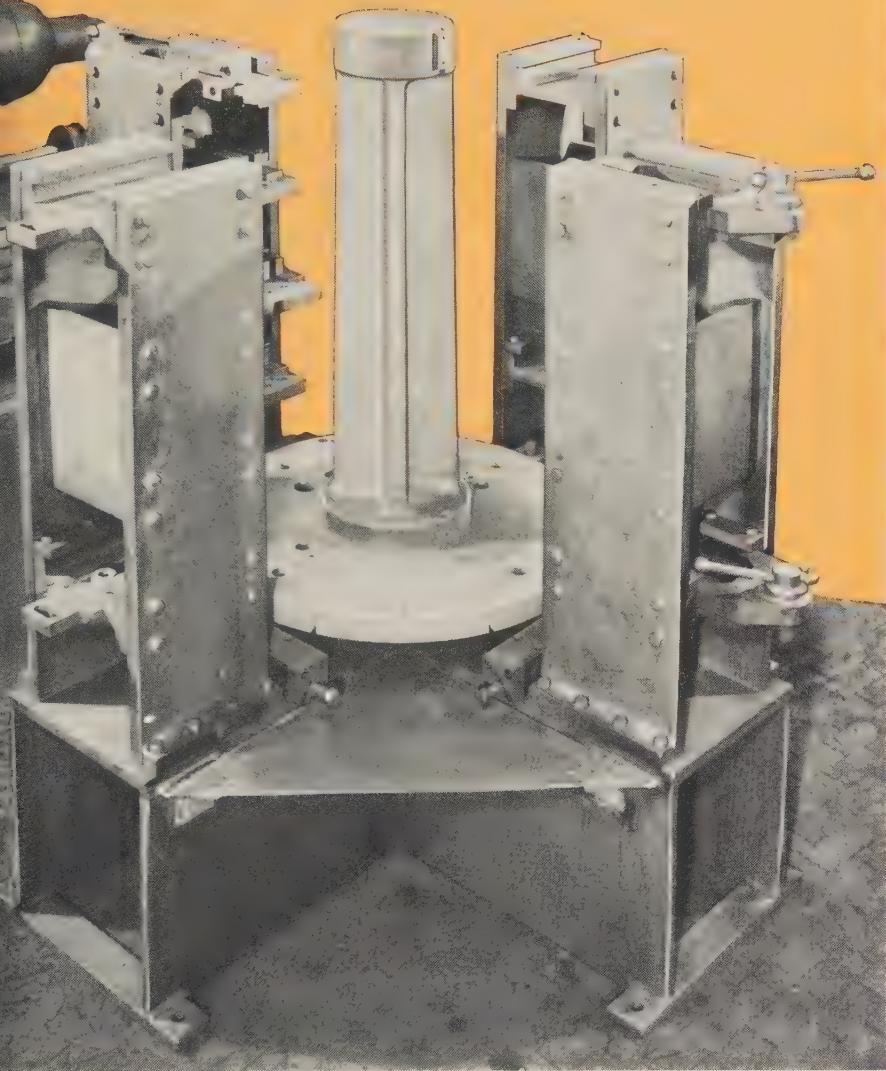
A special set-up and aligning fixture is used to aid in tack welding the four outer deck sub-assemblies to the stack-up sub-assembly. The tack-welding operation precedes the final submerged-arc welding operation.
